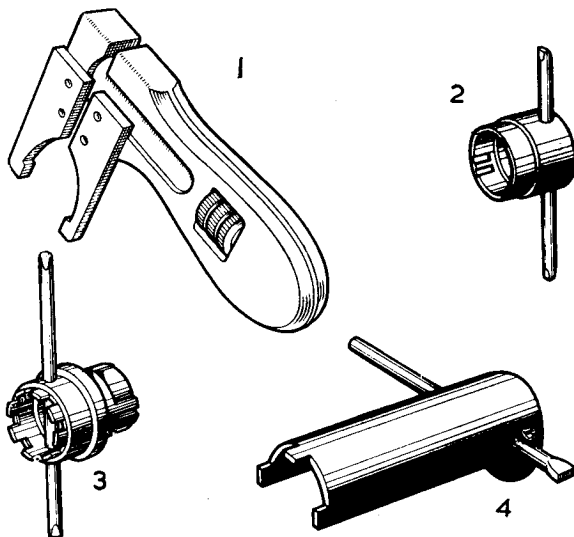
Tool kit for Mk. 4 plugs and sockets
